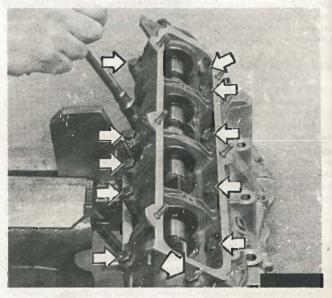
Camshaft housing securing bolts (arrowed) (Sec 19)
